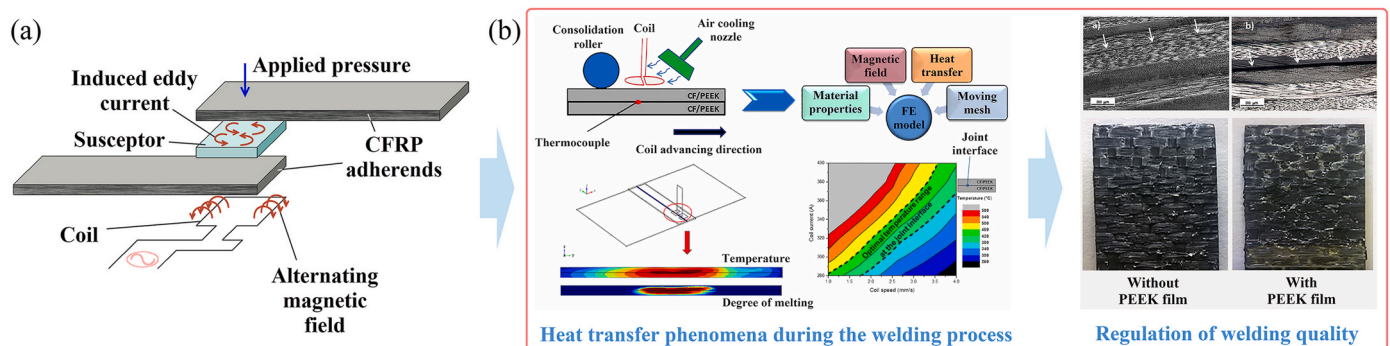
Schematic of (a) the induction welding and heat transfer and (b) enhanced welding quality of the CF/PEEK welded joints [149].
